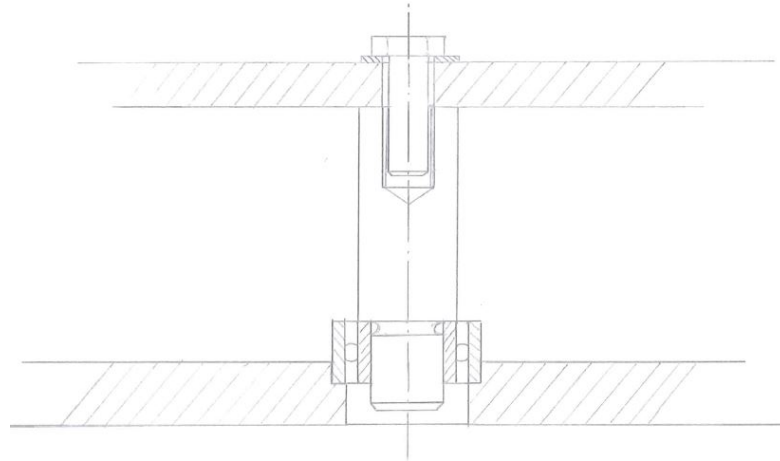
Technical drawing of the shaft at the bottom of the gimbal screwed to the frame. It is maintained and aligned by a ball bearing on this side.
